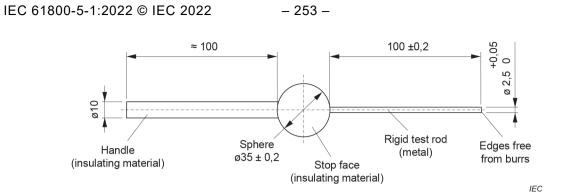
Test rod 2,5 mm according to IEC 61032:1997, test probe C
